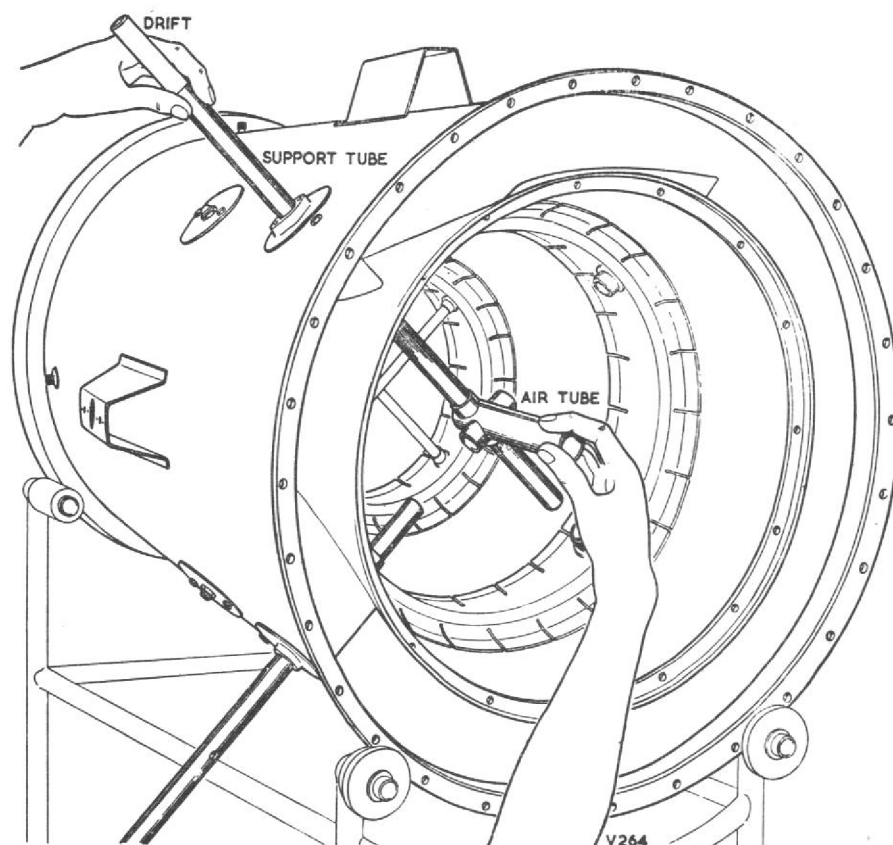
Assembling the air-tube in the centre of the exhaust cone
